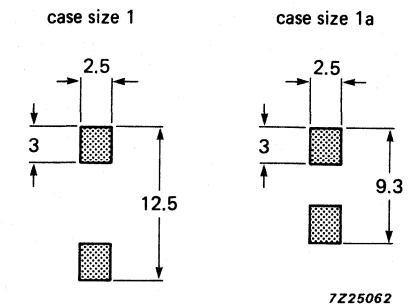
Recommended dimensions of metal connection pads on printed-circuit board or substrate surface for reflow soldering.
